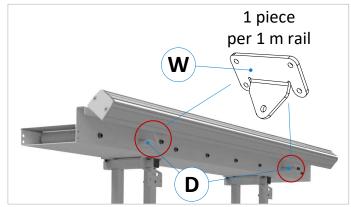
Mounting via 130° mounting bracket and spacer sleeve
